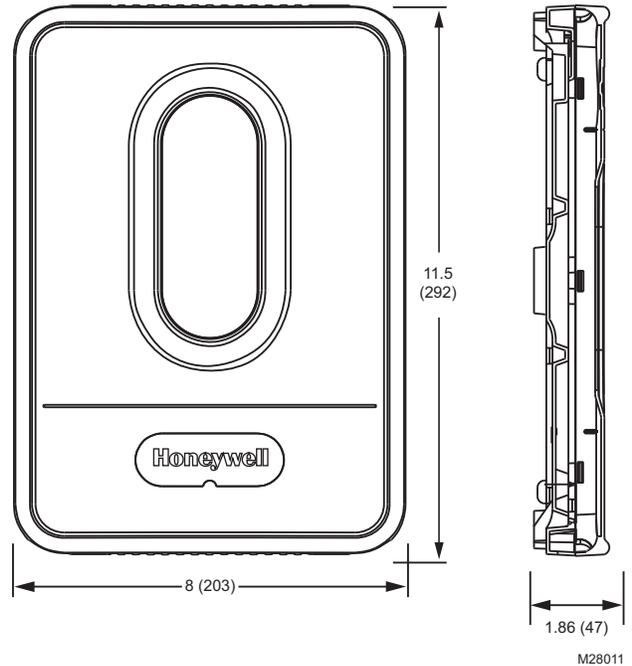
HZ322 TrueZONE panel dimensions in in. (mm).
